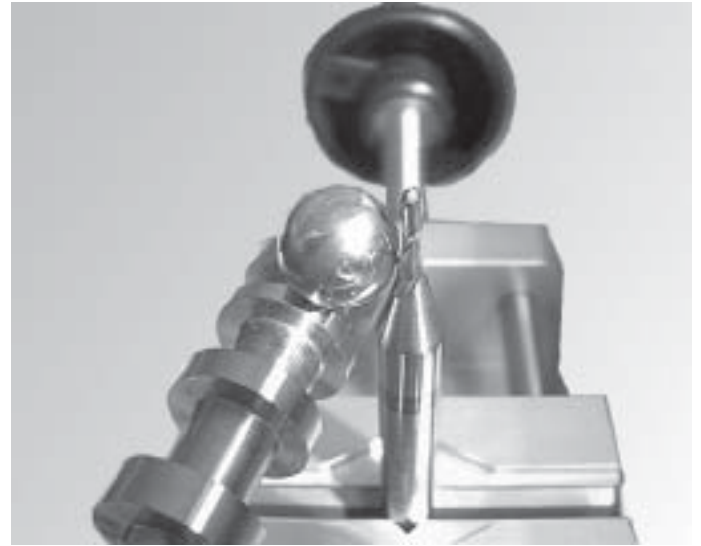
Detail of the Calotest being used to measure an end milling bit of small diameter. The dimensions of the ball, as well as the angle of the motorised shaft are important considerations.
